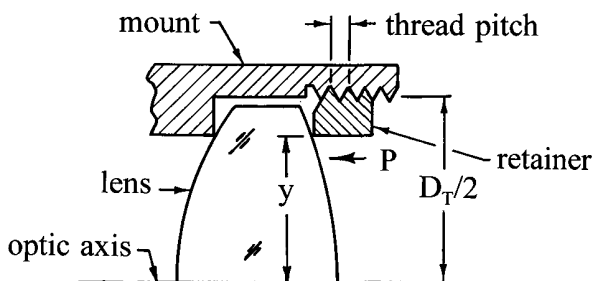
Schematic of a lens element clamped axially by a threaded retaining ring.
